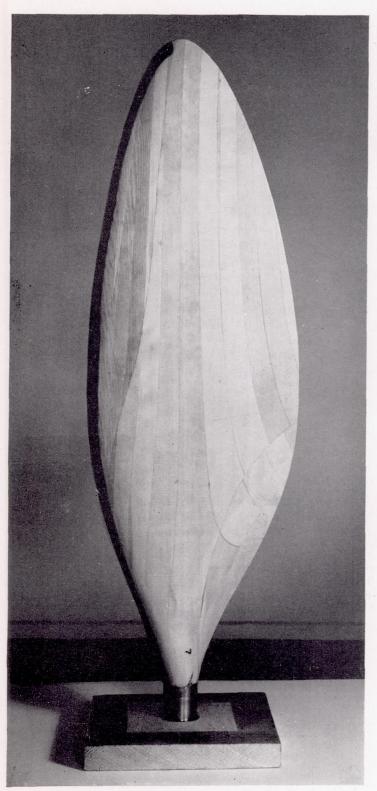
Typical propeller blade with metal root and rubber leading-edge strip.
